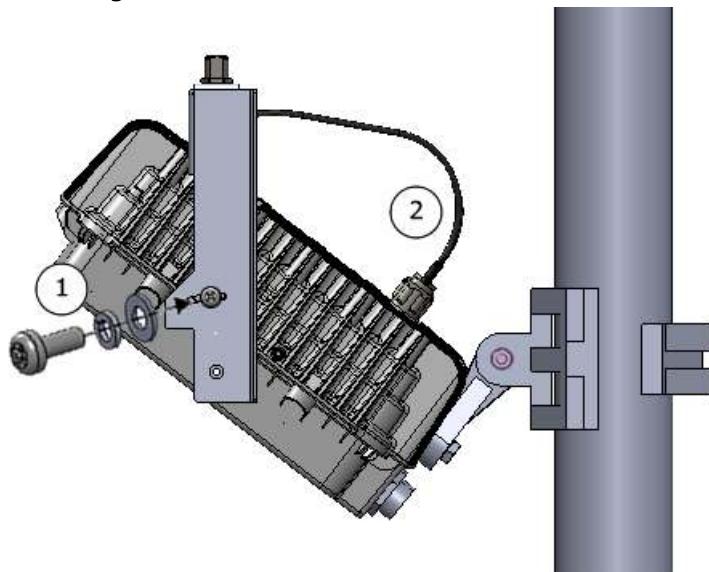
Mounting L-Bracket and attaching Antenna Wires
